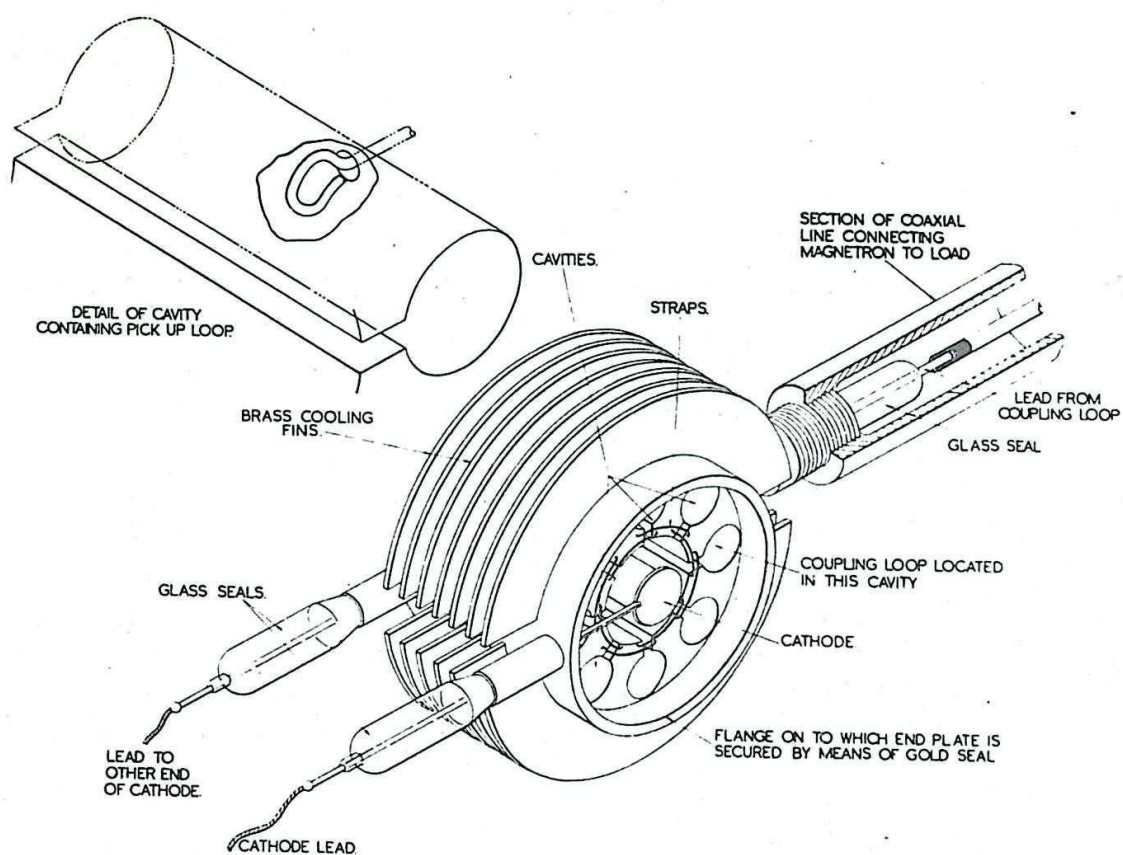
Typical hole and slot type magnetron with end plate removed.
